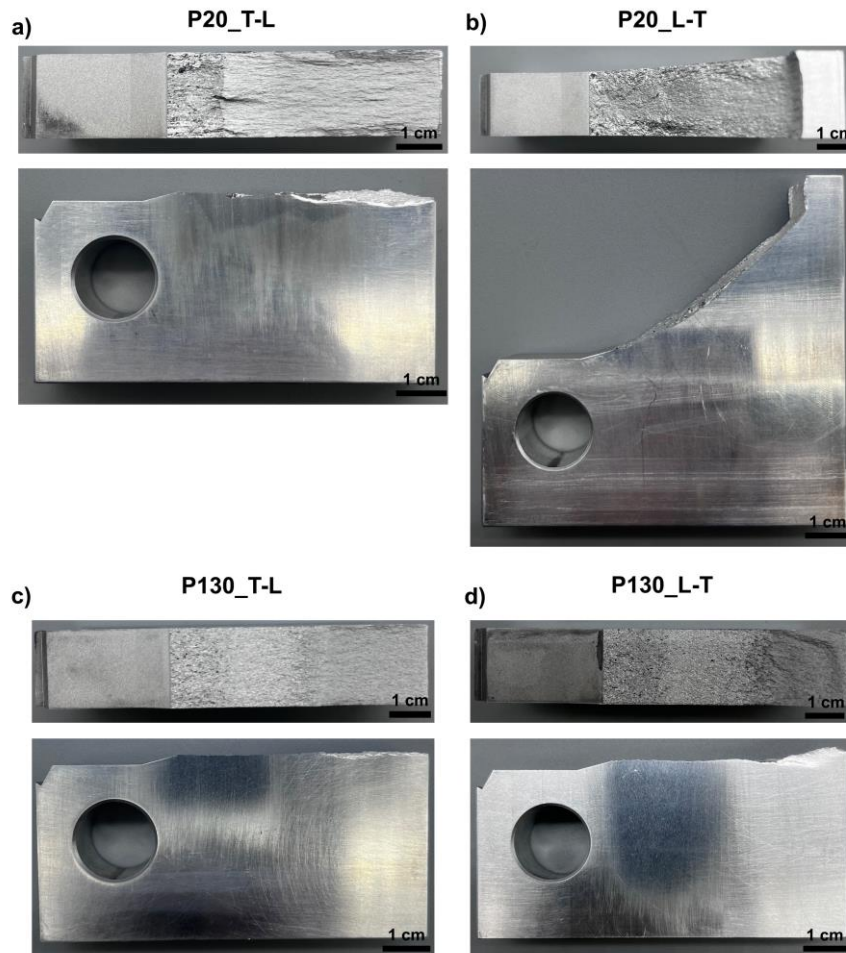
Fracture surface and side view photographs after FCG test of one representative sample of a) P20_T-L, b) P20_L-T, c) P130_T-L, and d) P130_L-T.
